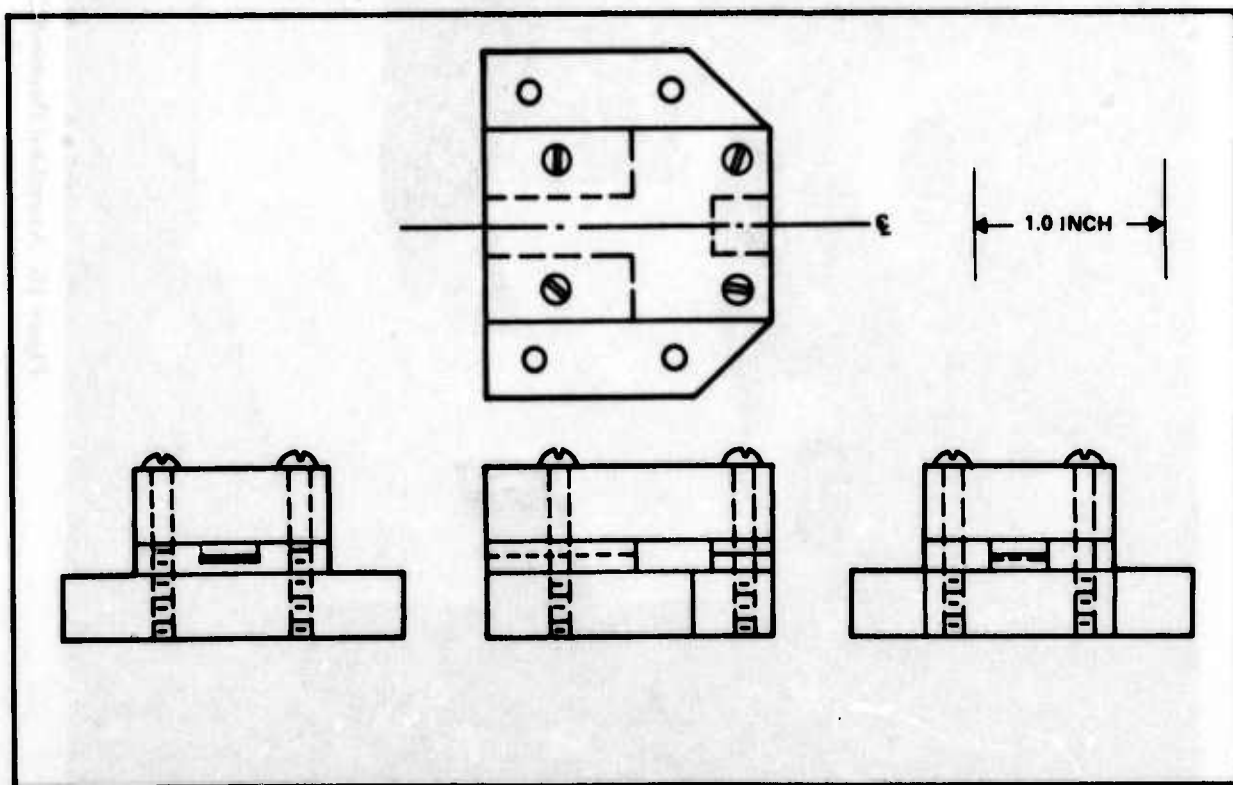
Initial Double-Sided Heat Sink Design (Type I)
